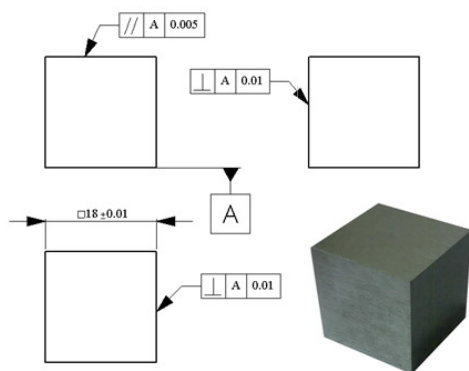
Dimensional size and geometrical tolerance of workpiece
